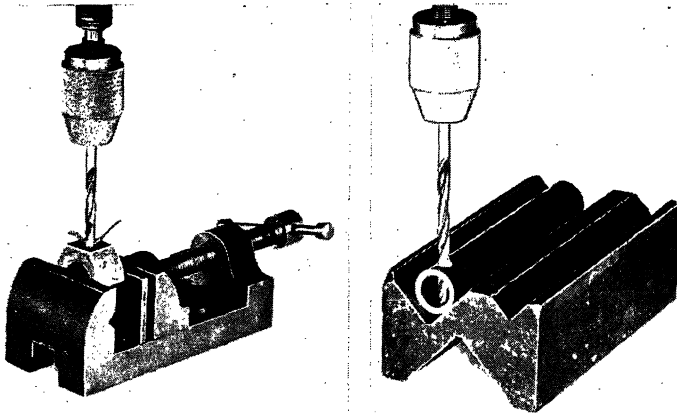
Method of using drill vise and "V" block for holding stock in place while drilling
